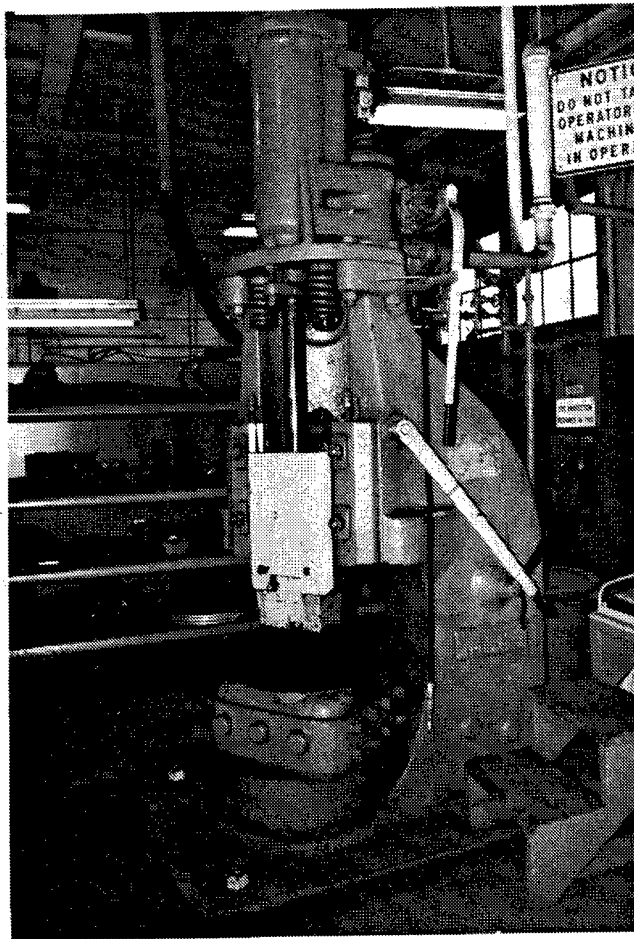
Building 520: An 800-pound, single-frame steam hammer manufactured in 1918 by Baldwin-Lima Hamilton.
